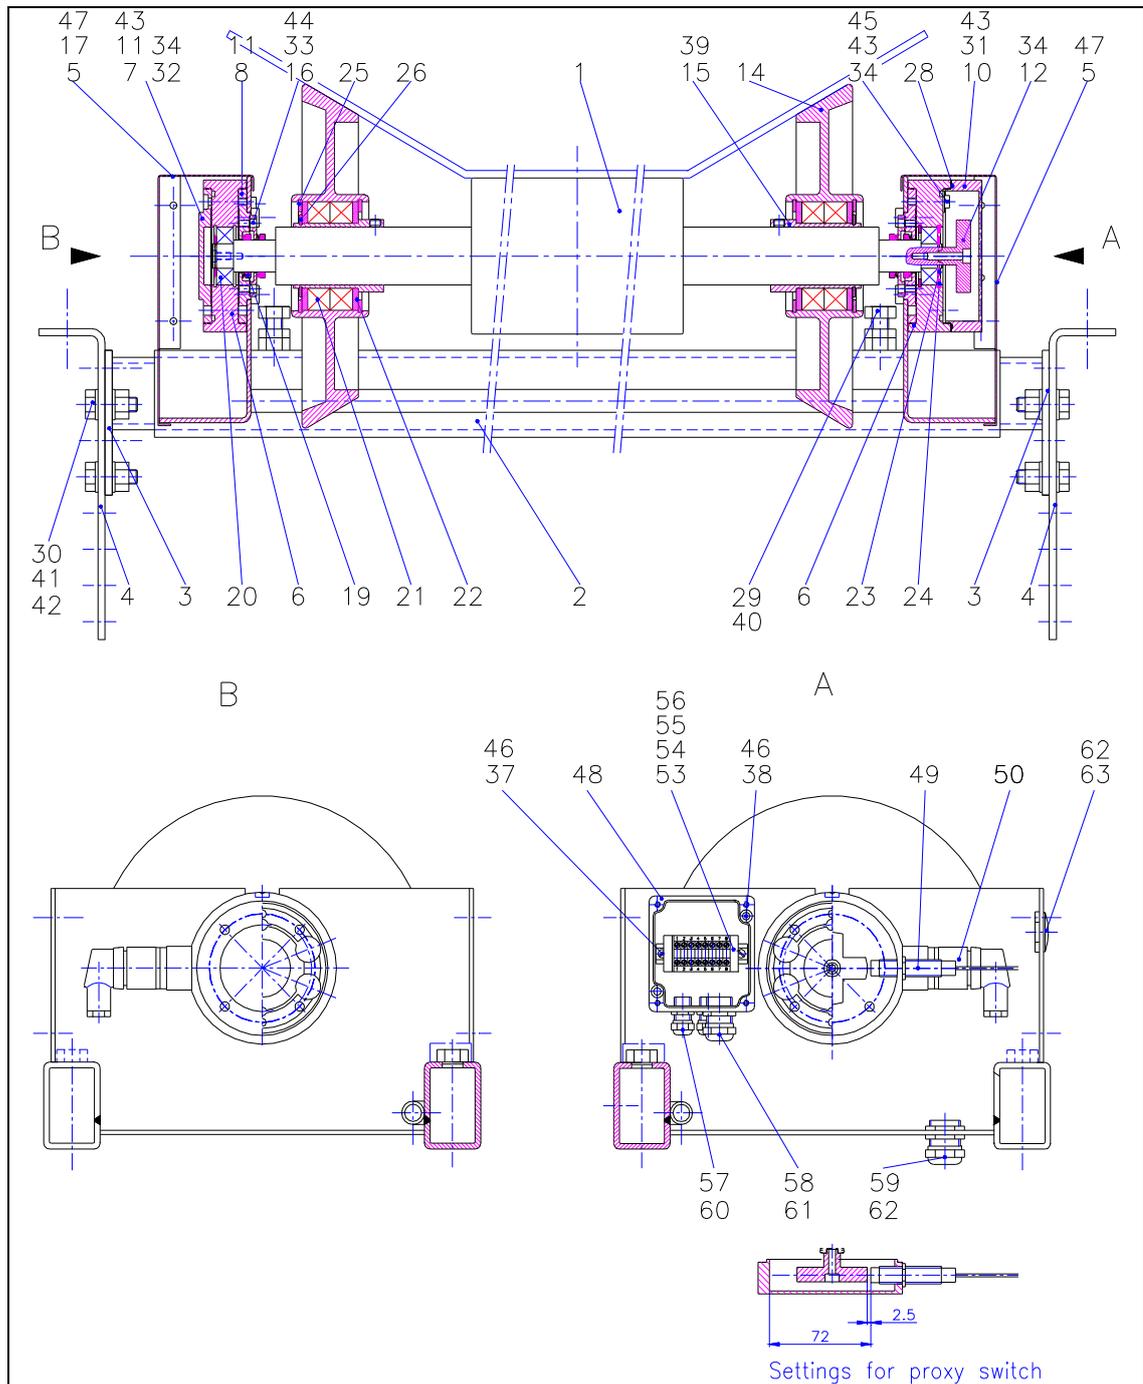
Troughed measuring roller. Rollers with Belt widths greater than 1000mm may have more than 1 pair of bevelled side disks.
